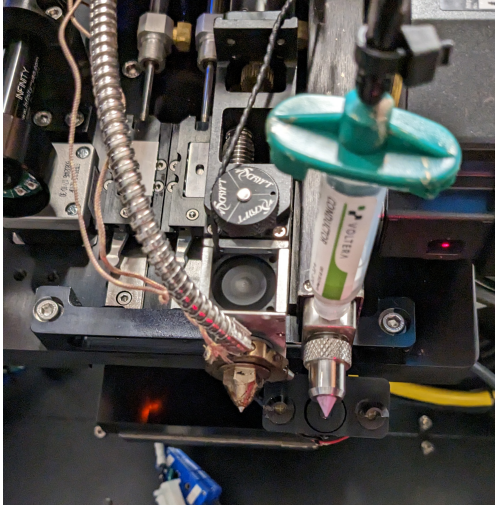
Printing tips of the 3D printer, The left is for printing dielectric filament while the right one (pink colored) is for silver ink printing
